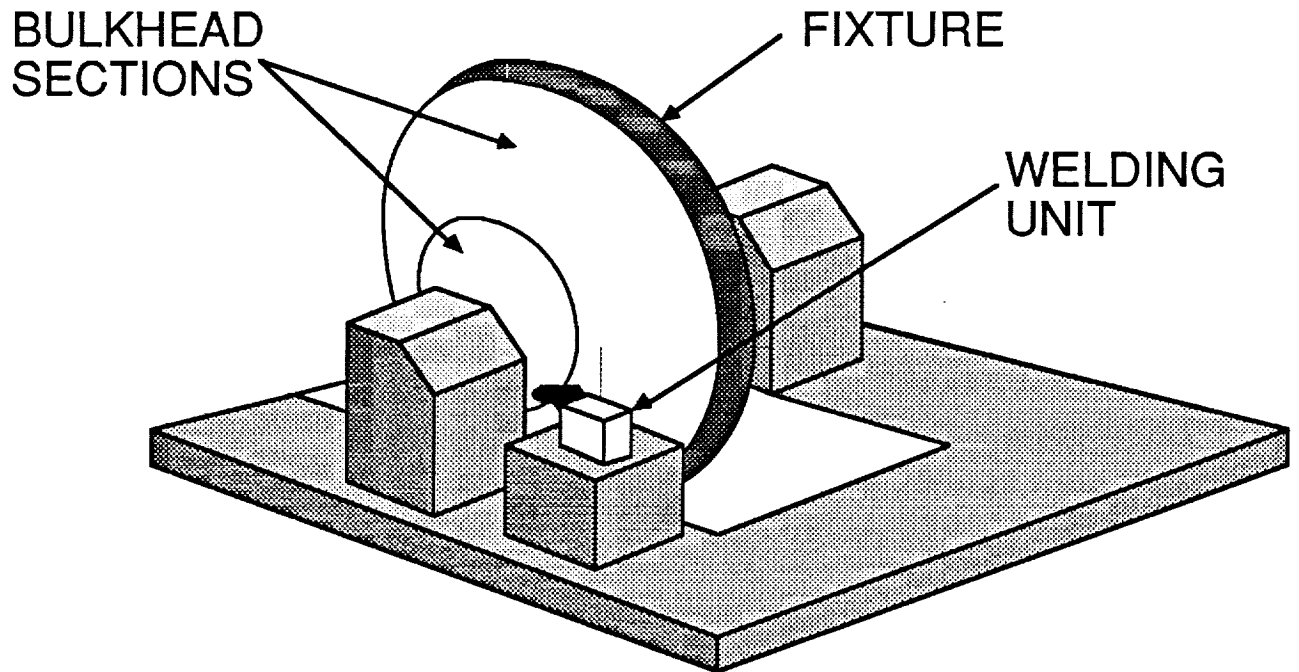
Tank bulkhead weld fixture tooling concept.
